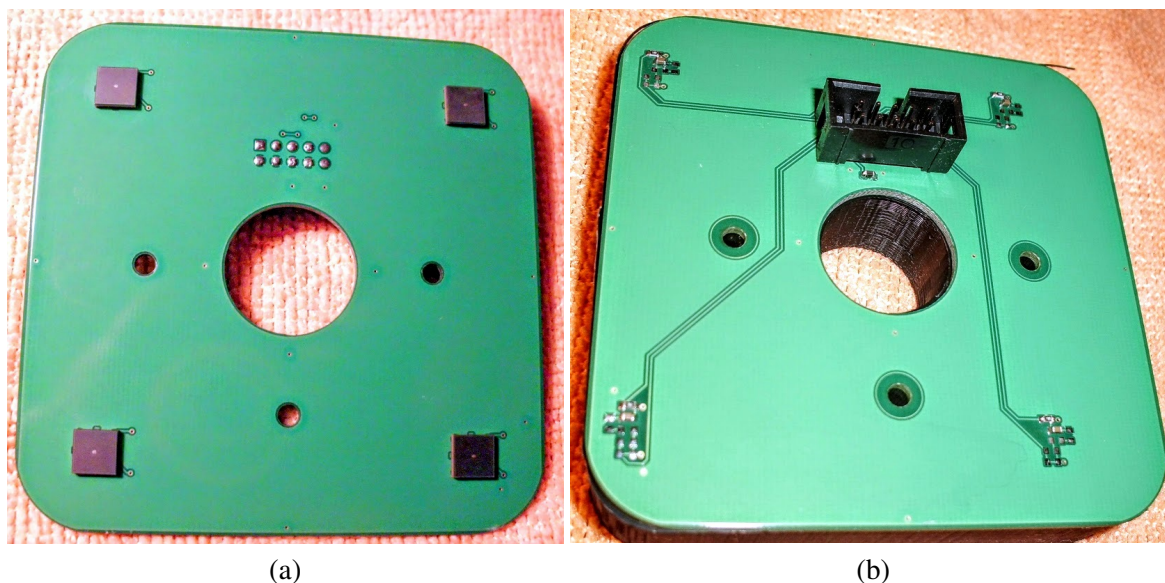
Printed circuit board with 4 MPPC diodes: front (a) and back (b) sides.
